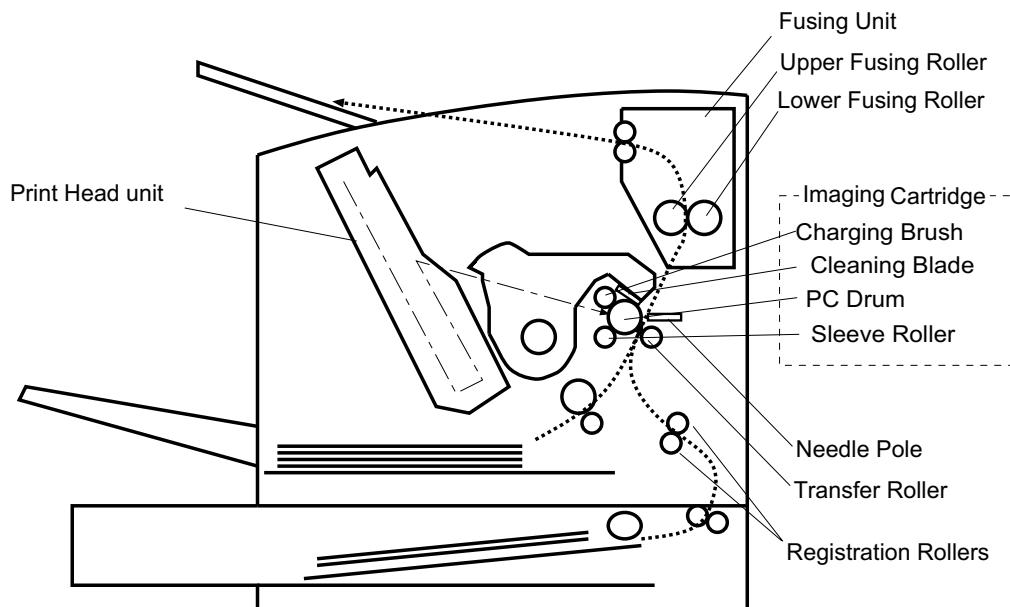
Mechanism Parts and Paper Paths for Main Printing Process
